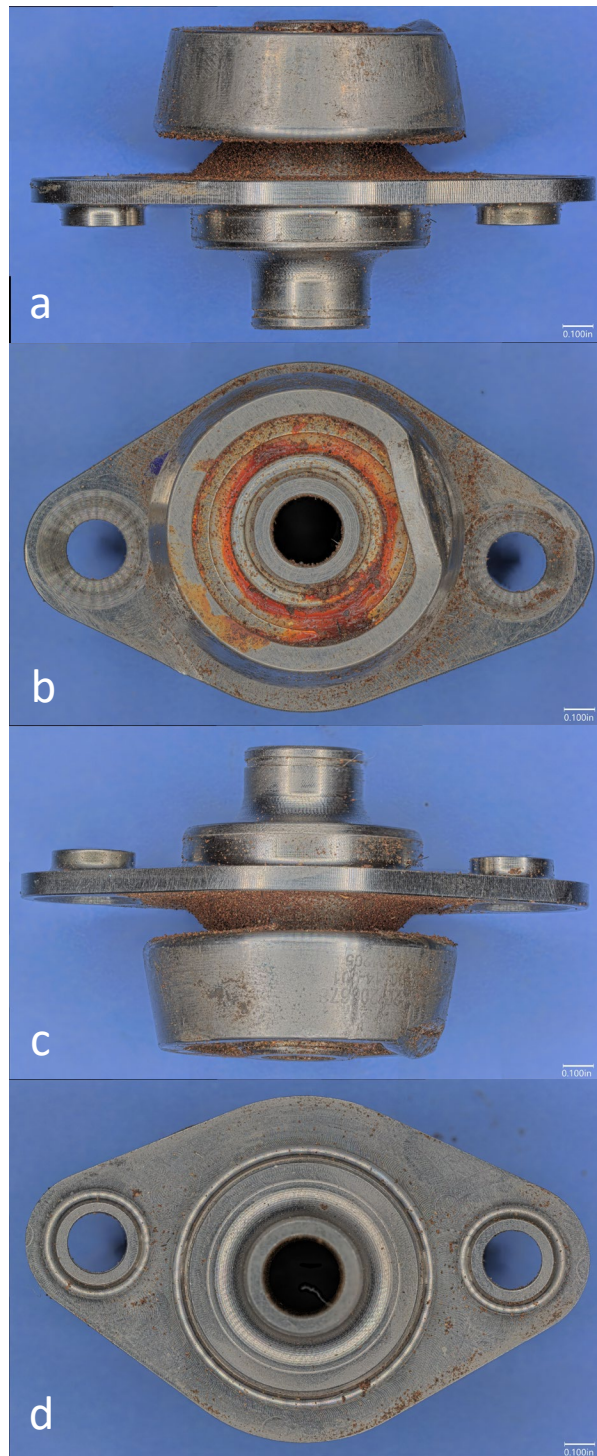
Images of the Station 3 mount are shown in Figure 6. The bearing shaft has been fractured from the mount (bearing and shaft portion were not recovered from the accident scene). Figures 7 and 8 show the overall fracture surface at the base of the bearing shaft using digital and scanning electron (SEM) microscopy, respectively. Approximately 90% of the fracture surface is mechanically damaged and precluded fractographic examination. The undamaged areas of the fracture surface exhibited fracture features consistent with monotonic overload (detail images are shown in Figures 9 and 10).
